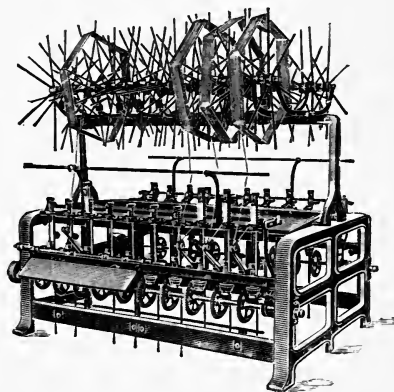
Improved Tubular Winding Machine for Solid Weft Cops (R. Hall & Sons).
